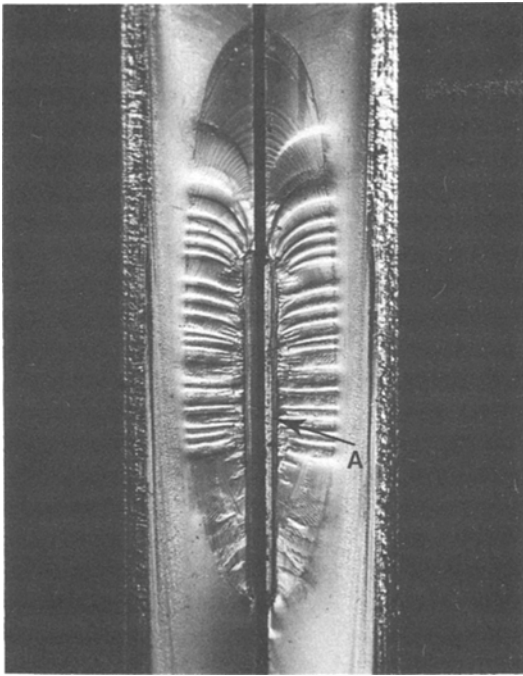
Matching fracture faces of Perspex fatigue specimen. Surfaces coated with aluminium and illuminated to indicate topographical relationships. Magnification $\times 5.5$.
